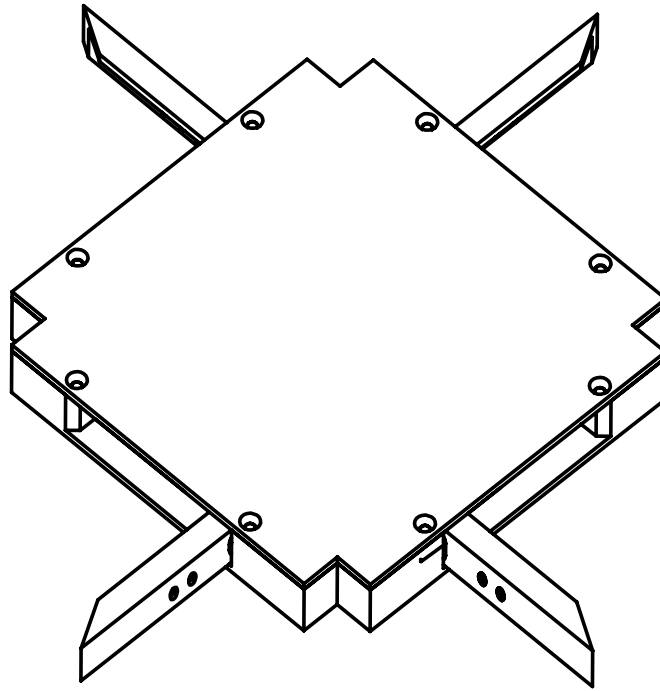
Solar Panel Plate Design (Viewed Horizontally)
